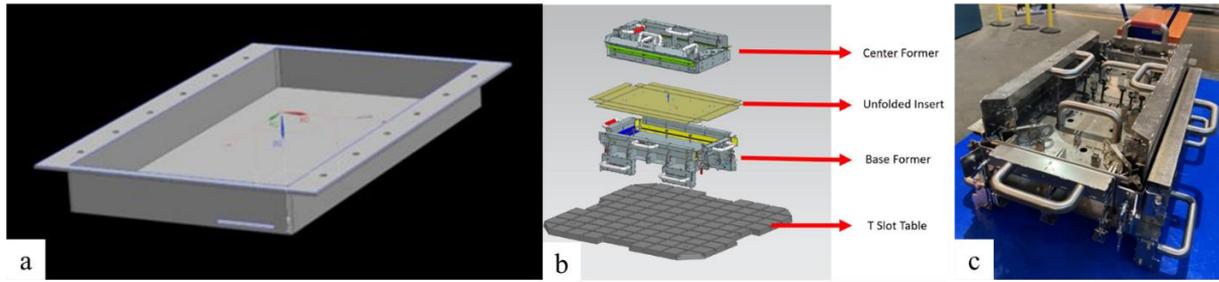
(a) Composite battery module case design (b) MetLase bending jig - exploded view (c) manufactured jig
